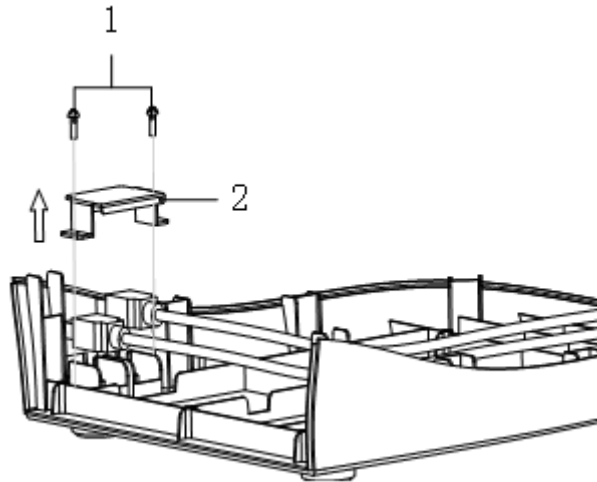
Sketch Map of USB Extension Line Disassembly
